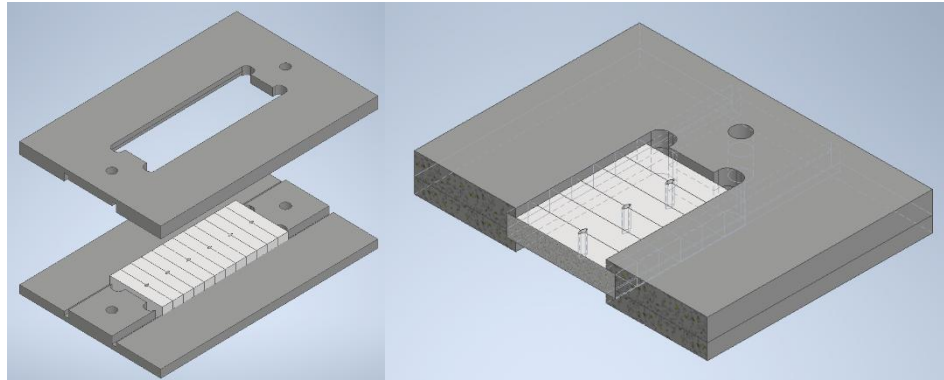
Designed jig model showcasing clamping of samples for LSP.
